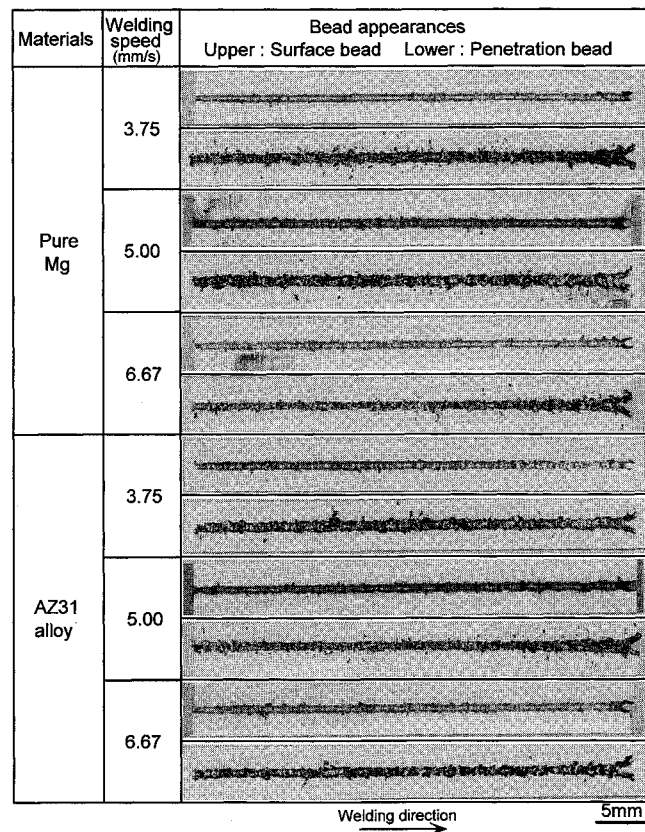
Effect of welding speed on bead appearances of electron beam welded pure magnesium and AZ31 magnesium alloy joints.
